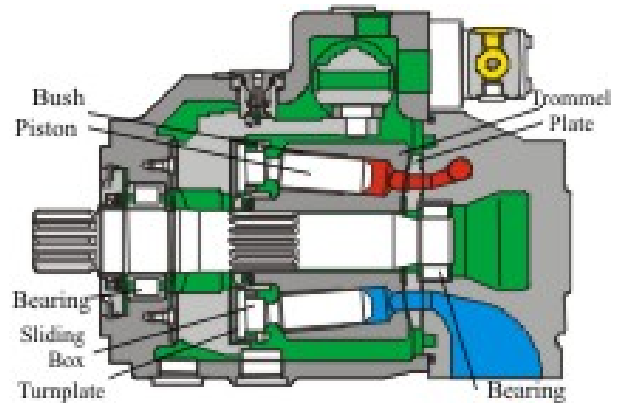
Investigated A4V axial piston machine with the typical wear areas [1]
